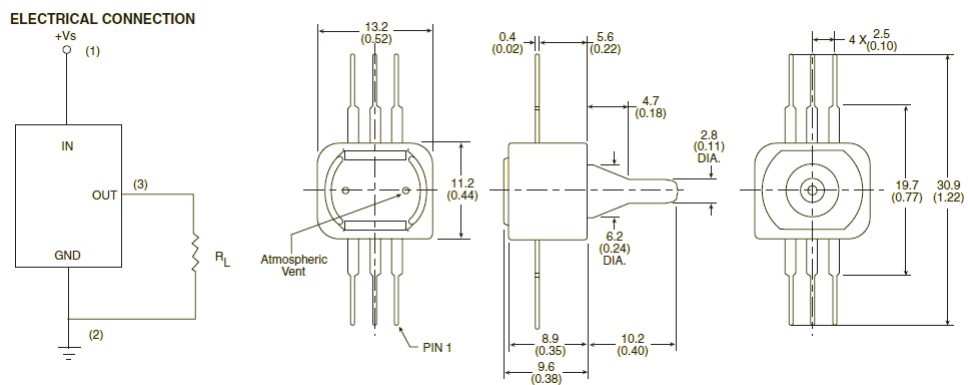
Pressure Transducer Schematic Drawing. Dimensions: mm (in)
